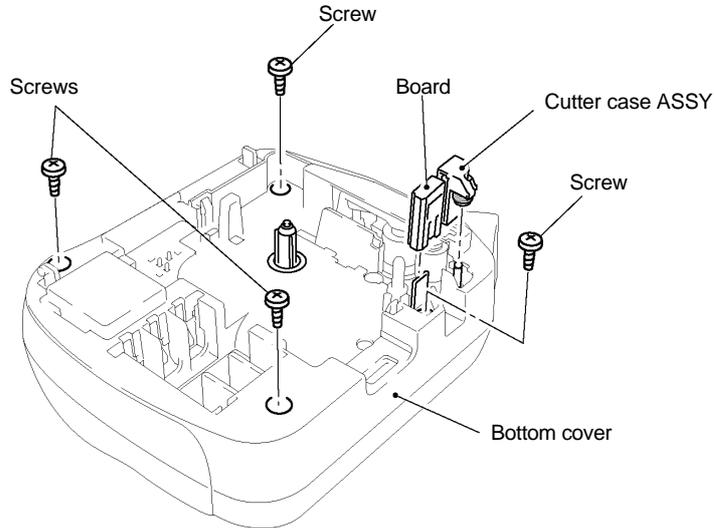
Removing the Bottom Cover, Cutter Case ASSY and the Board (1)
